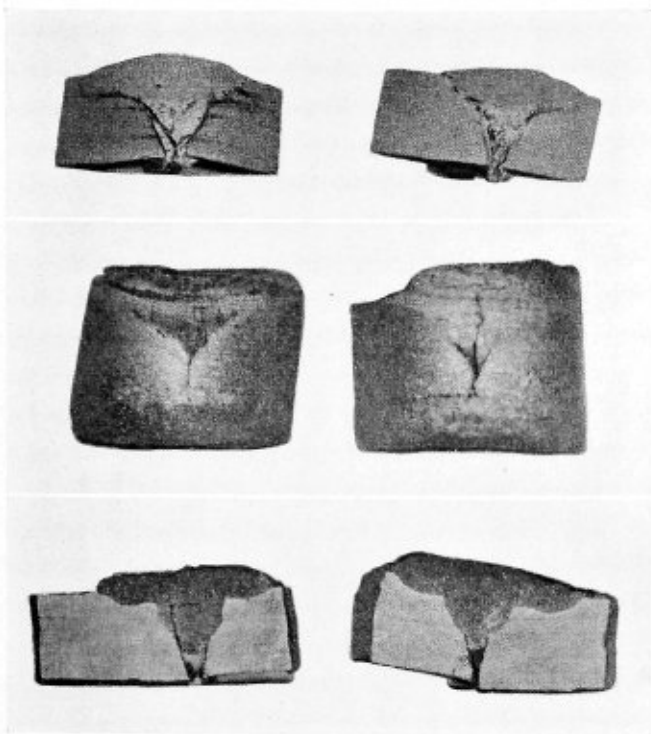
(Top) Specimens from fusion welded ammonia brine cooler. Fig. 7—(Center) Plugs cut from welded ammonia generator. Fig. 8—(Bottom) Plugs from fusion welded soap kettle
